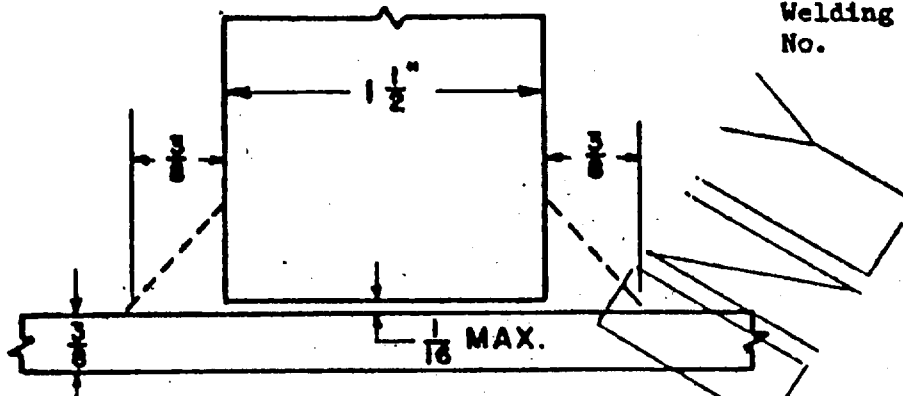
Recorded joint welding procedure for joints D-D, E-E, F-F and G-G.
